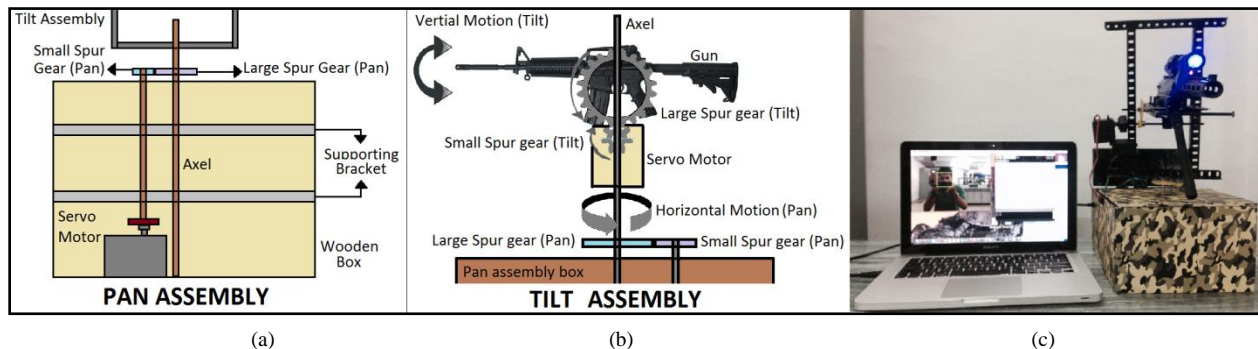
(a) Pan assembly, (b) Tilt assembly, (c) Project setup
